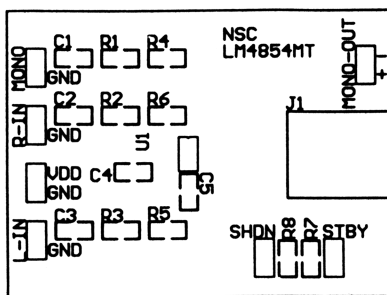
Recommended MT PC Board Layout: Component-Side SilkScreen
